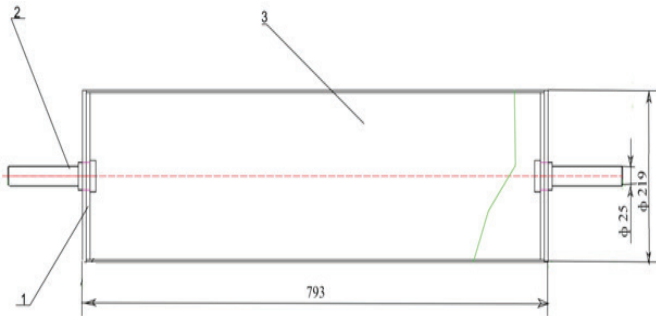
General view of the roller without mounted sector discs: 1- side roller, 2- axis, 3- hollow cylinder
